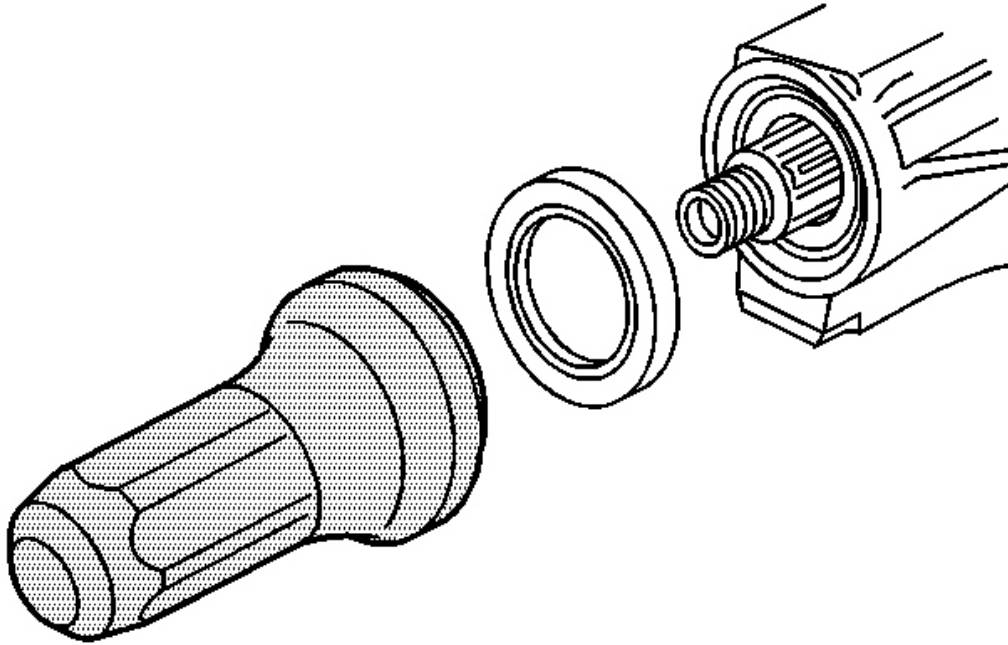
Installing New Pinion Oil Seal Using J 22388
